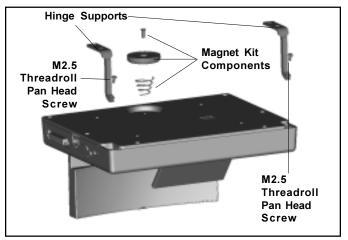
FRICTION HINGE MOUNTING KIT COMPONENTS
